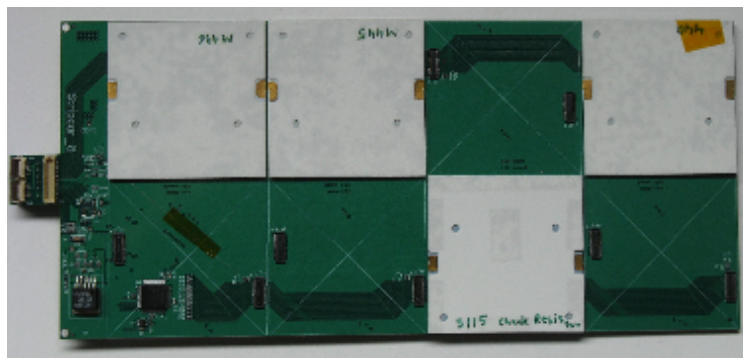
Prototype of the carrier board (green) with four installed minipad modules (white).
